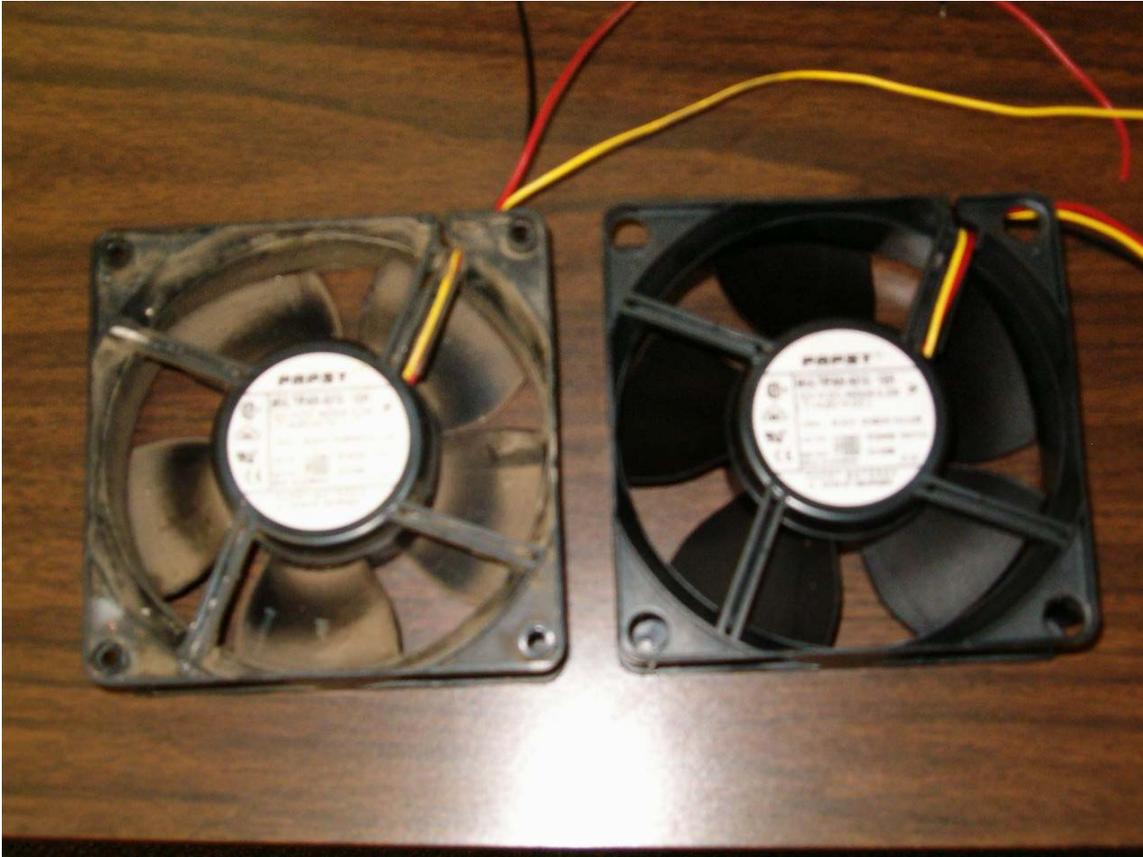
Aspirated shield fans before (left) modifying by enlarging the mounting holes, and after the modification (right). The mounting holes are enlarged from the original 0.17” to be 0.40” diameter.
